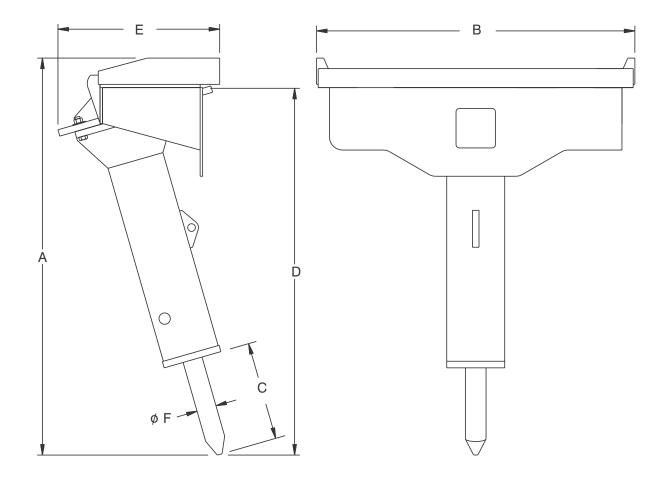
Typical Street Hammer Dimension Drawing Shown with 1-Position Skid Steer Mounting Configuration
